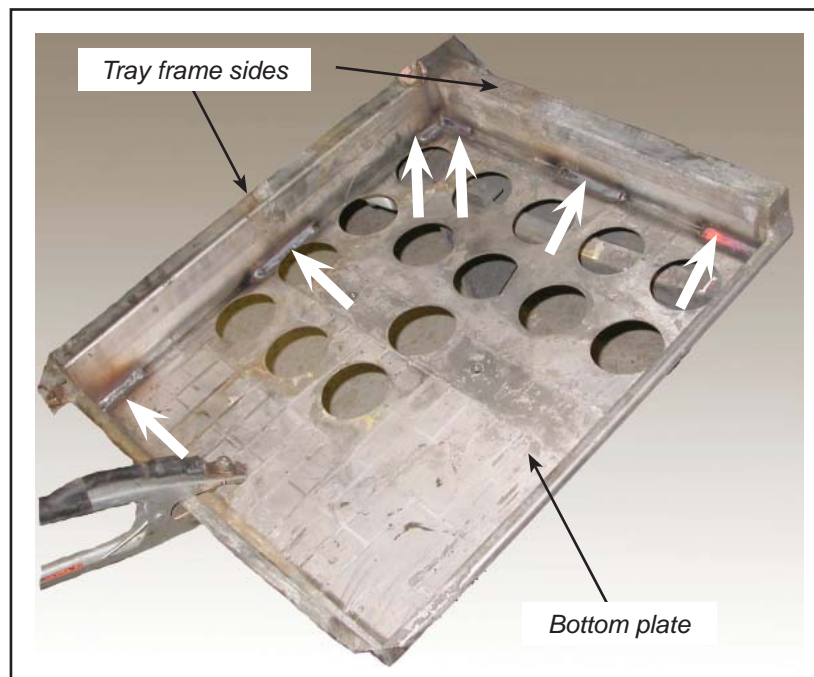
Three Bead Welds per Pivoting Tray Frame Side (Six in All)
